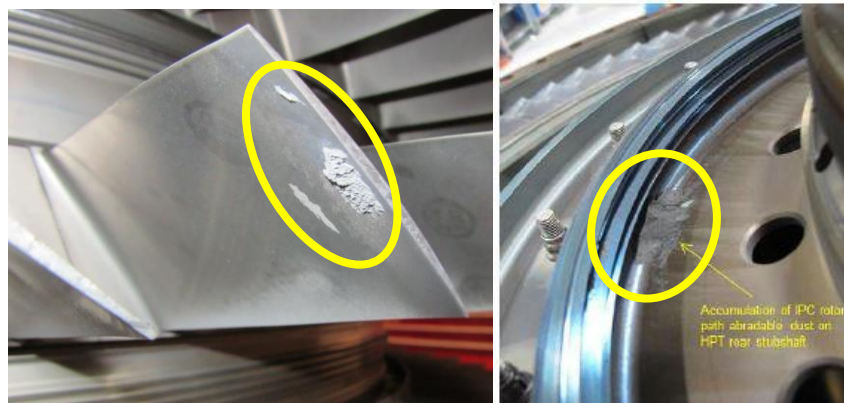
Grey coloured dust deposit found on a Stage 3 IPC rotor blade (left) and the HPT stubshaft (right)
